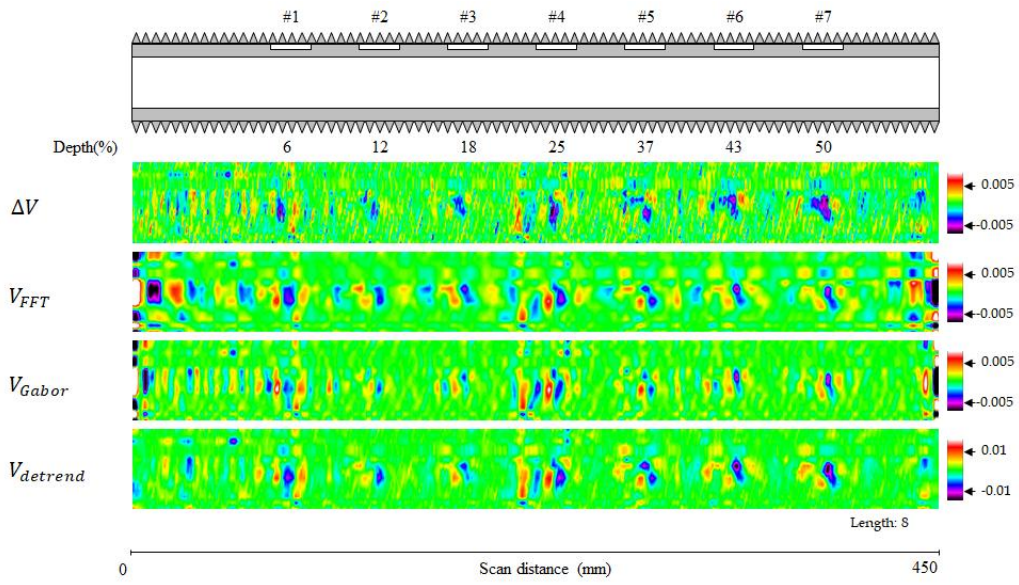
22 Specimen S#4 (Tapered Wear, cutting process)
